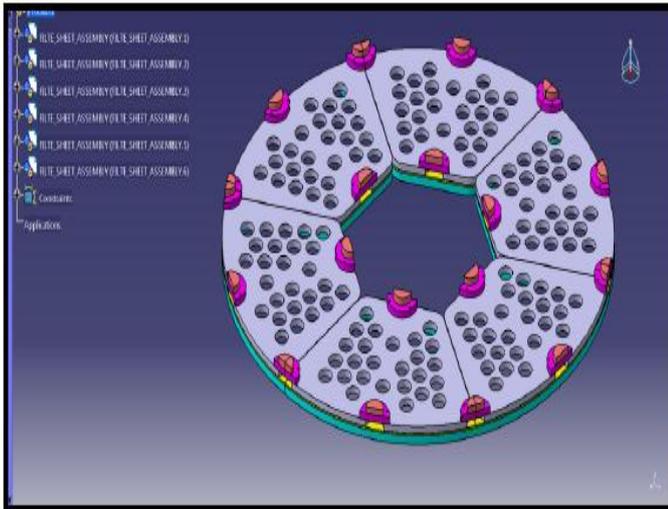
3-D drawing of Complete Filter sheet Plate Assembly
